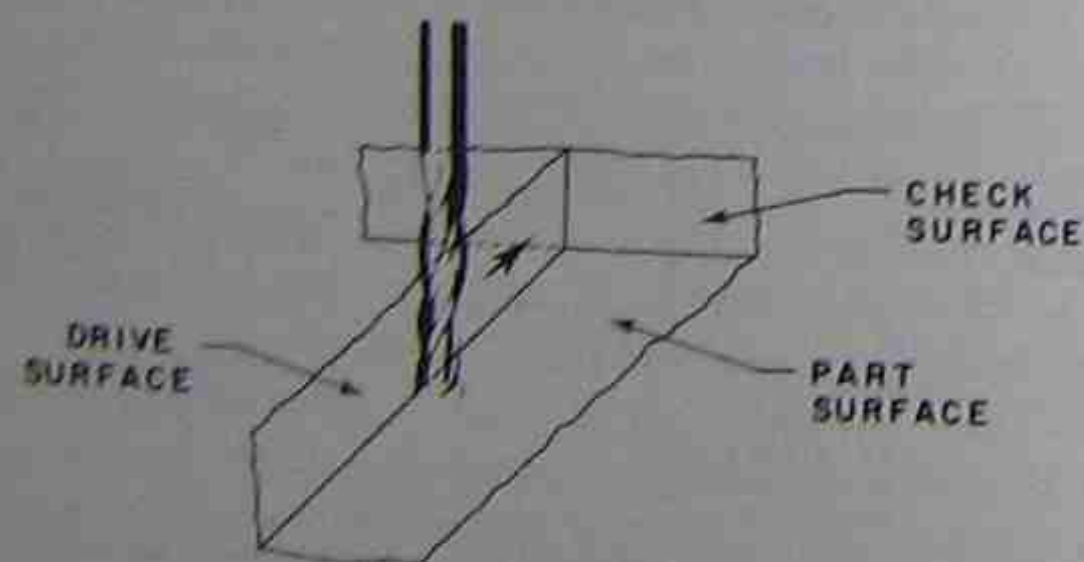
The path of the cutter is guided by the part surface and the drive surface. To check the motion a third surface is used, and this is appropriately called the check surface.
